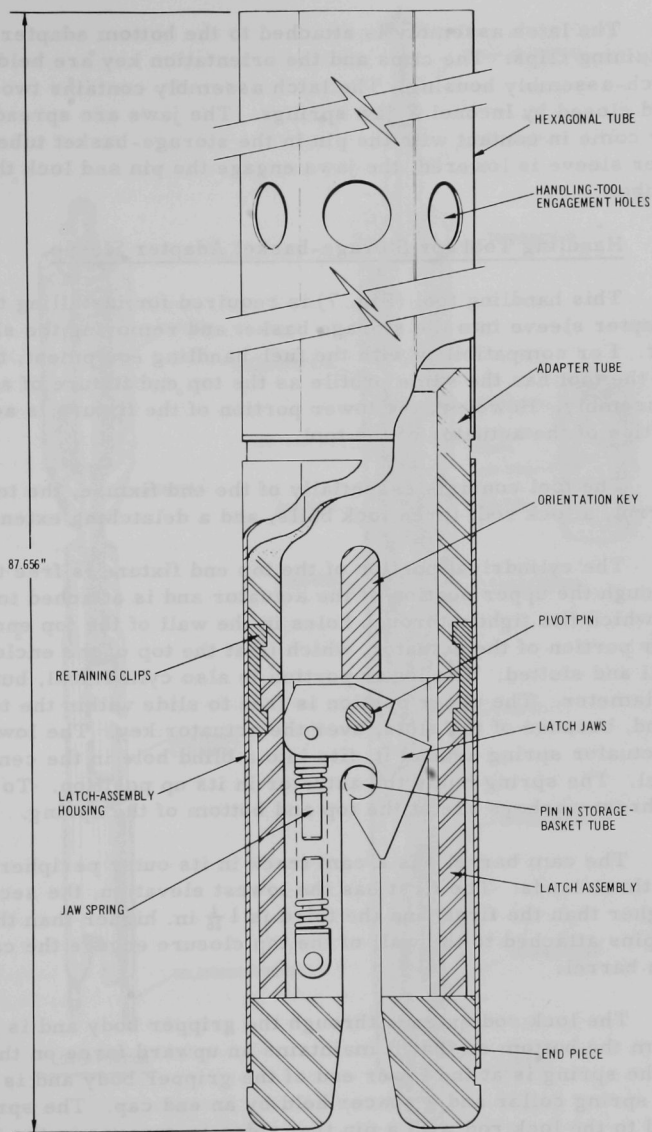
Storage-basket Adapter Sleeve for Mark IIB Oscillator Rod
